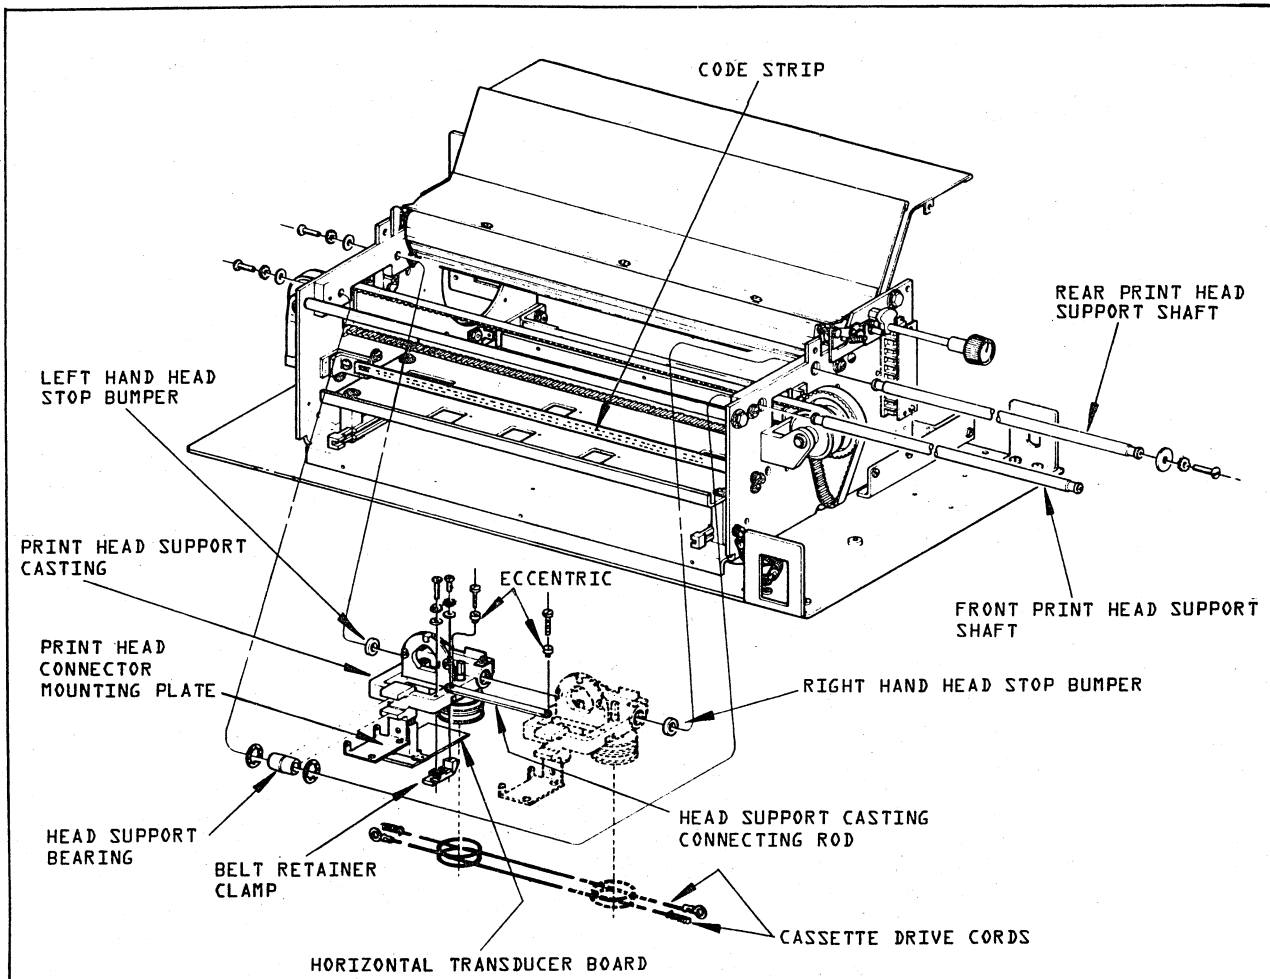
HEAD SUPPORT SHAFTS AND PRINT HEAD SUPPORT CASTING REPLACEMENT
